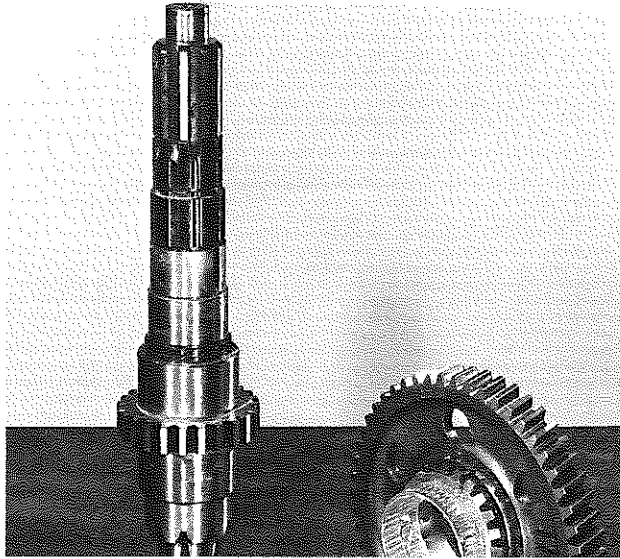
Mainshaft, 1st Speed Gear and Caged Needle Bearings
